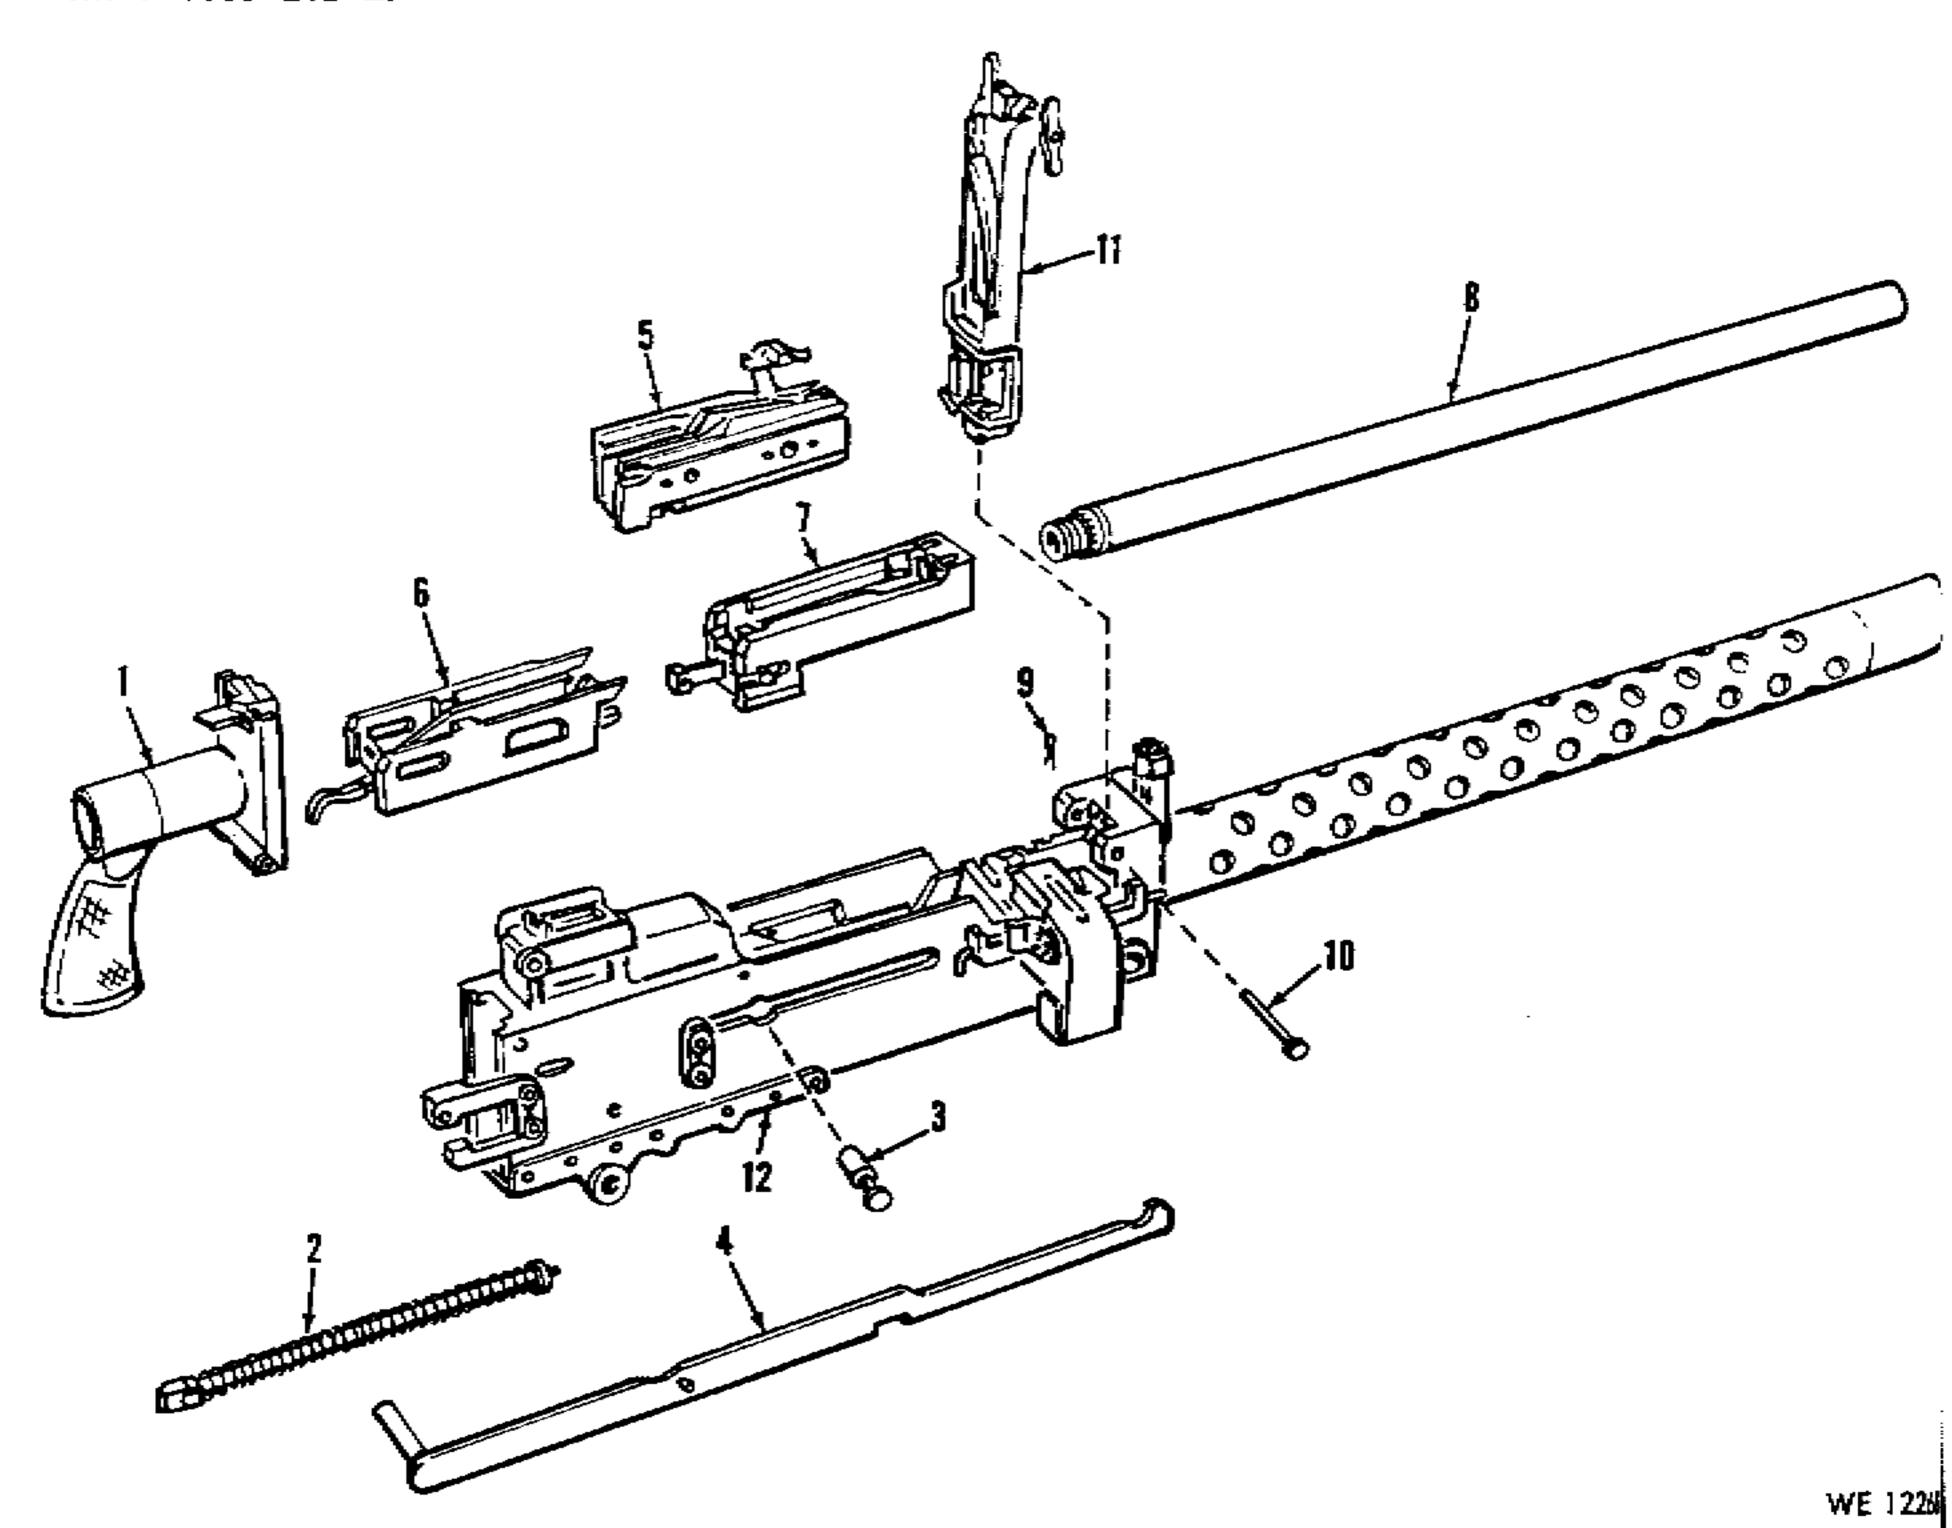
Caliber .30 Machine Gun, M37—major groups and assemblies—partial exploded view.
